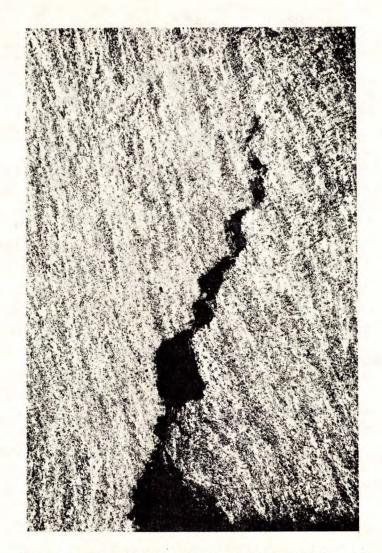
Cracking from pits in weld metal (inside surface).
